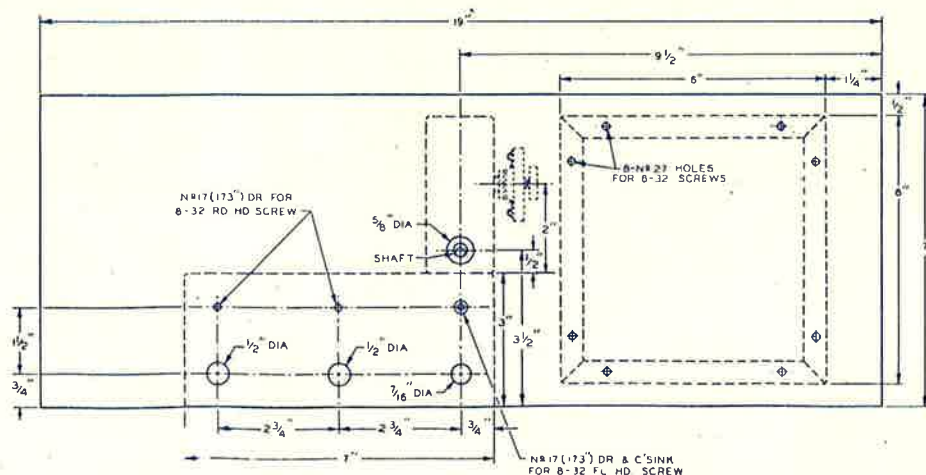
Panel-layout drawing showing the location of the power-supply chassis, VFO box, and the dial gear box.
